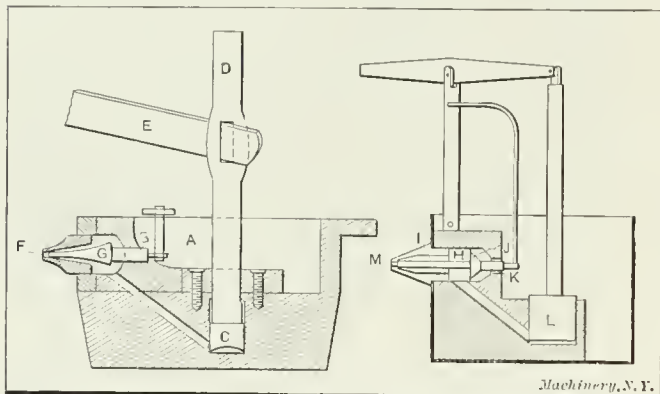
Type-casting Machine built in 1849. Fig. 2. Improvement in the Type-casting Machine, made in 1856
